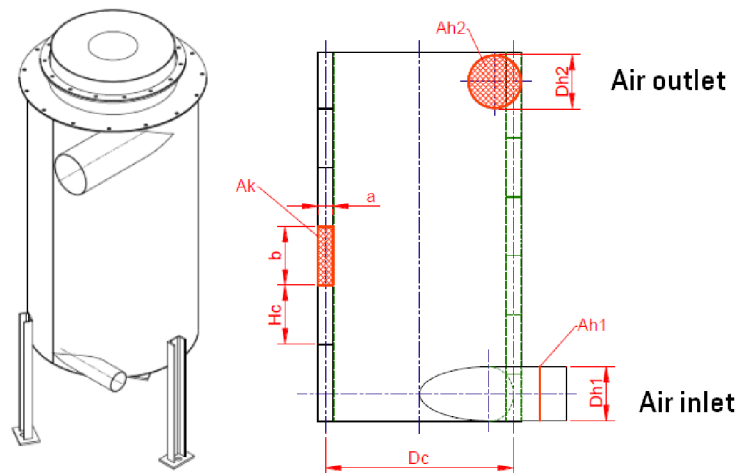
View of the jacketed combustion chamber for air preheating [48]
